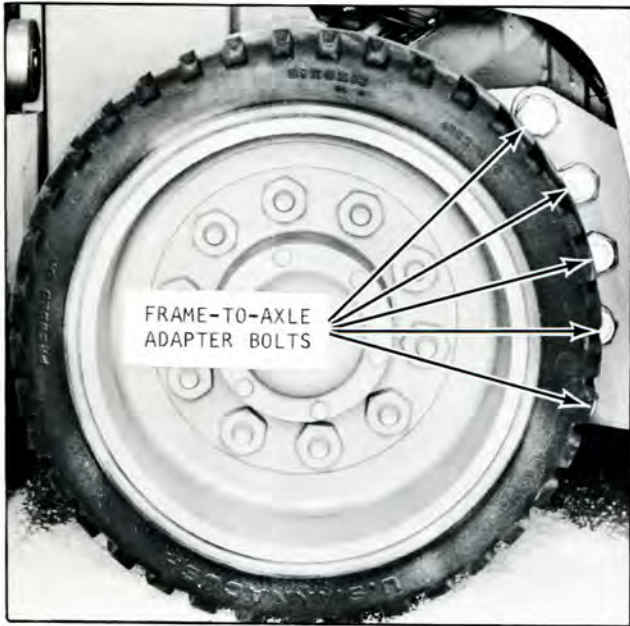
Typical Frame -to- Axle Adapter Bolts (Cushion Machines)
